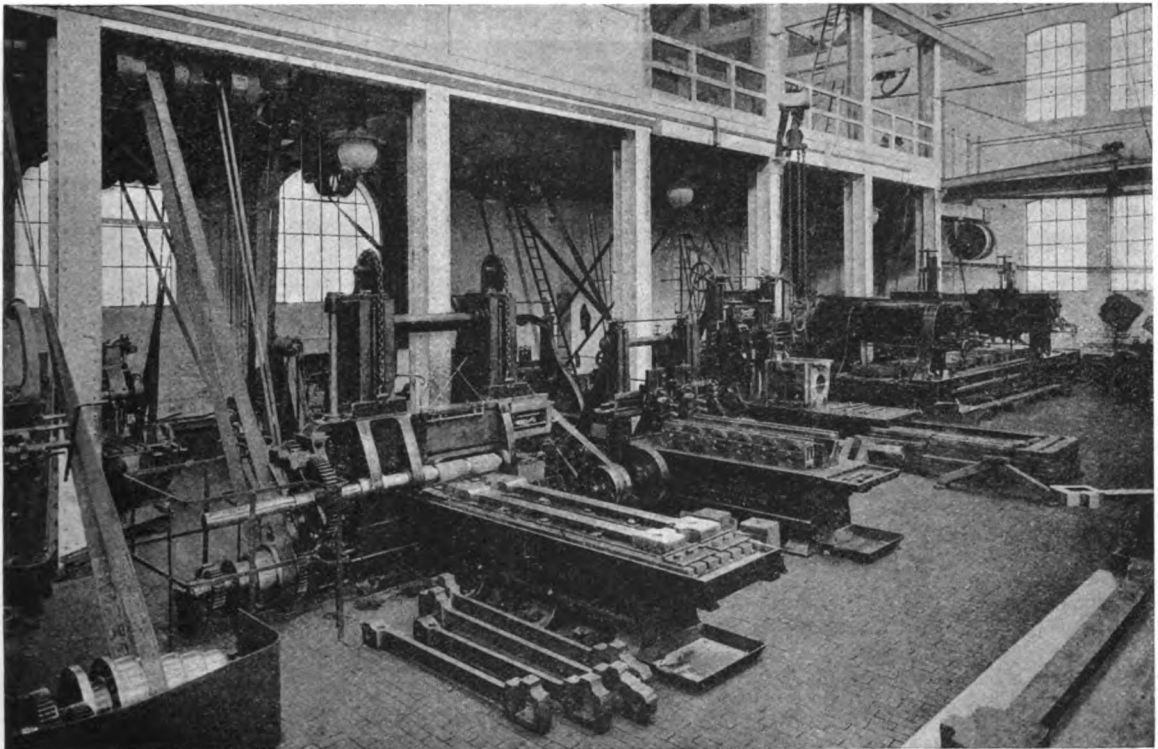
A VIEW IN HEAVY MACHINE SHOP: MESSRS. PECKETT & SONS' WORKS, BRISTOL.
